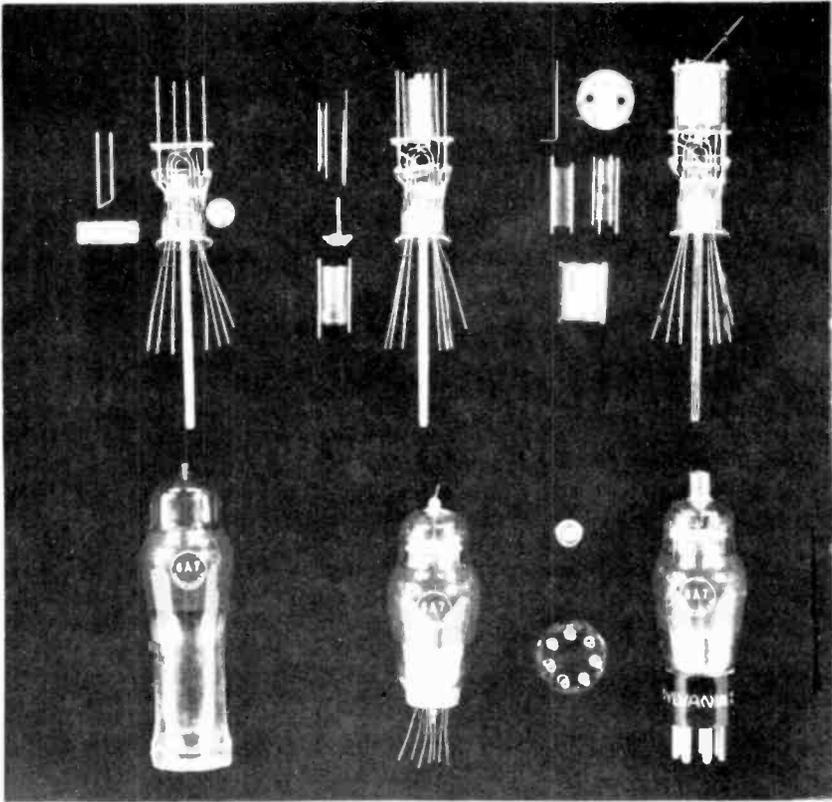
Assembly of a glass tube arranged in the progressive stages of construction.
